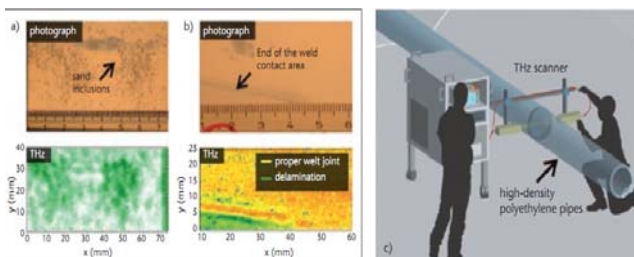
Photographs and THz images of plastic weld joints
